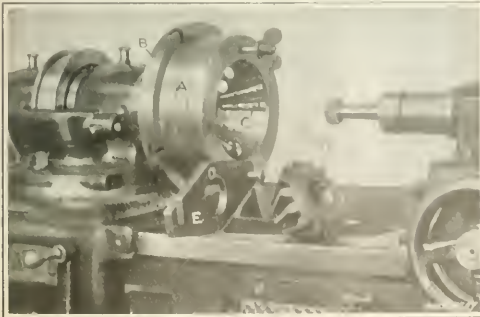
Another Chuck for holding Bevel Pinions when grinding Hole
